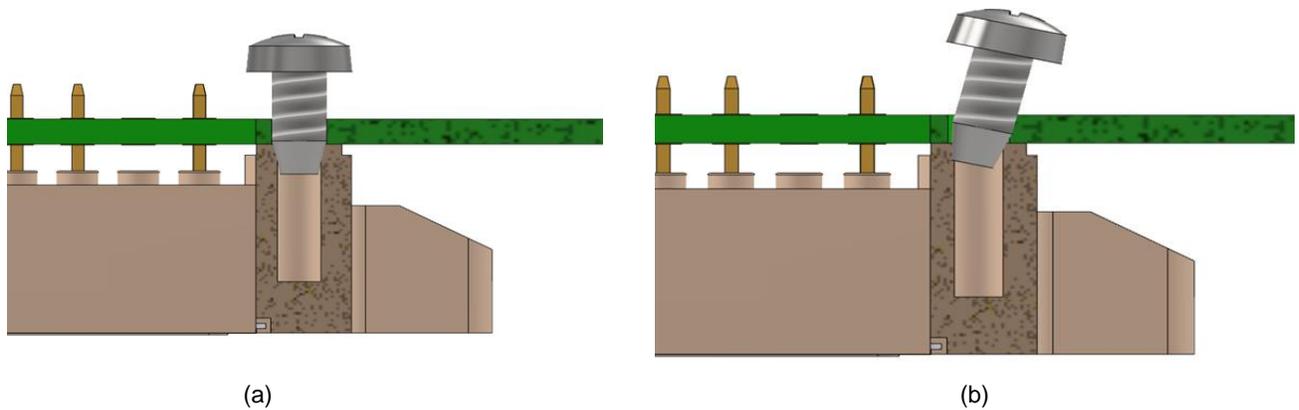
PCB mounting on E1B module: vertical alignment of self-tapping screw (a) aligned, and (b) misaligned.
